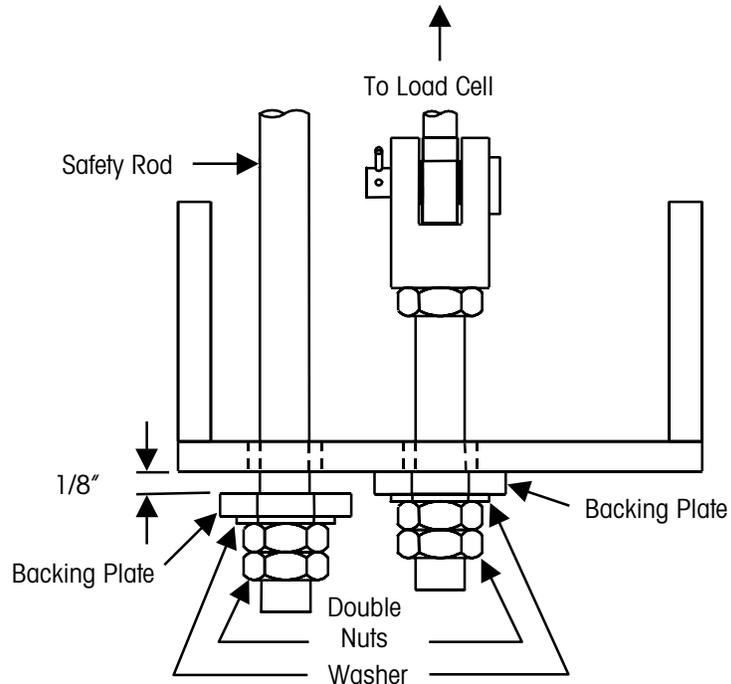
Weigh Module Assembly Attached to Lower Support Bracket
